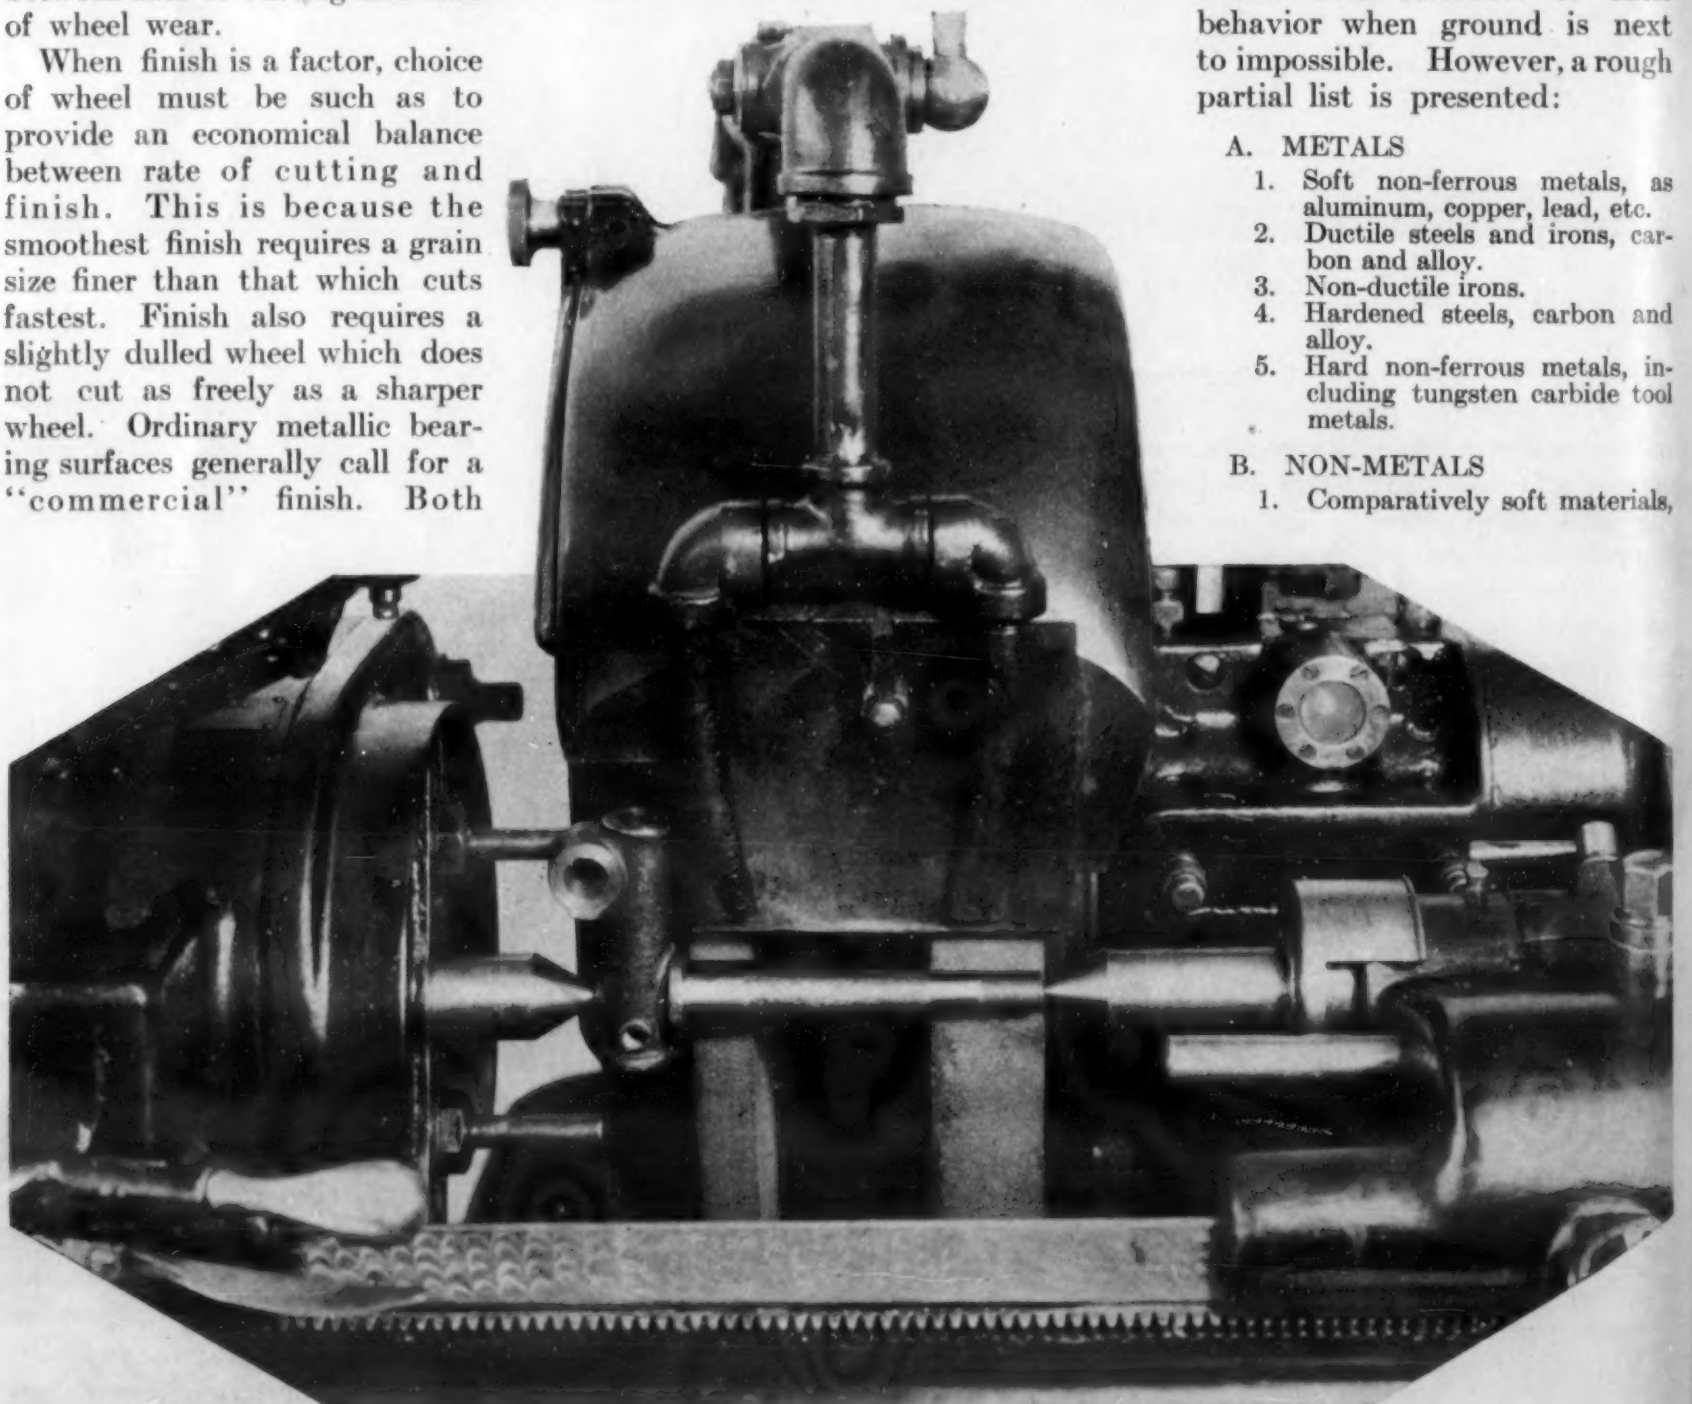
Twin Wheel Mounting. By Grinding Two Diameters in One Operation the Cost of Parts Made in Large Quantities Is Reduced
